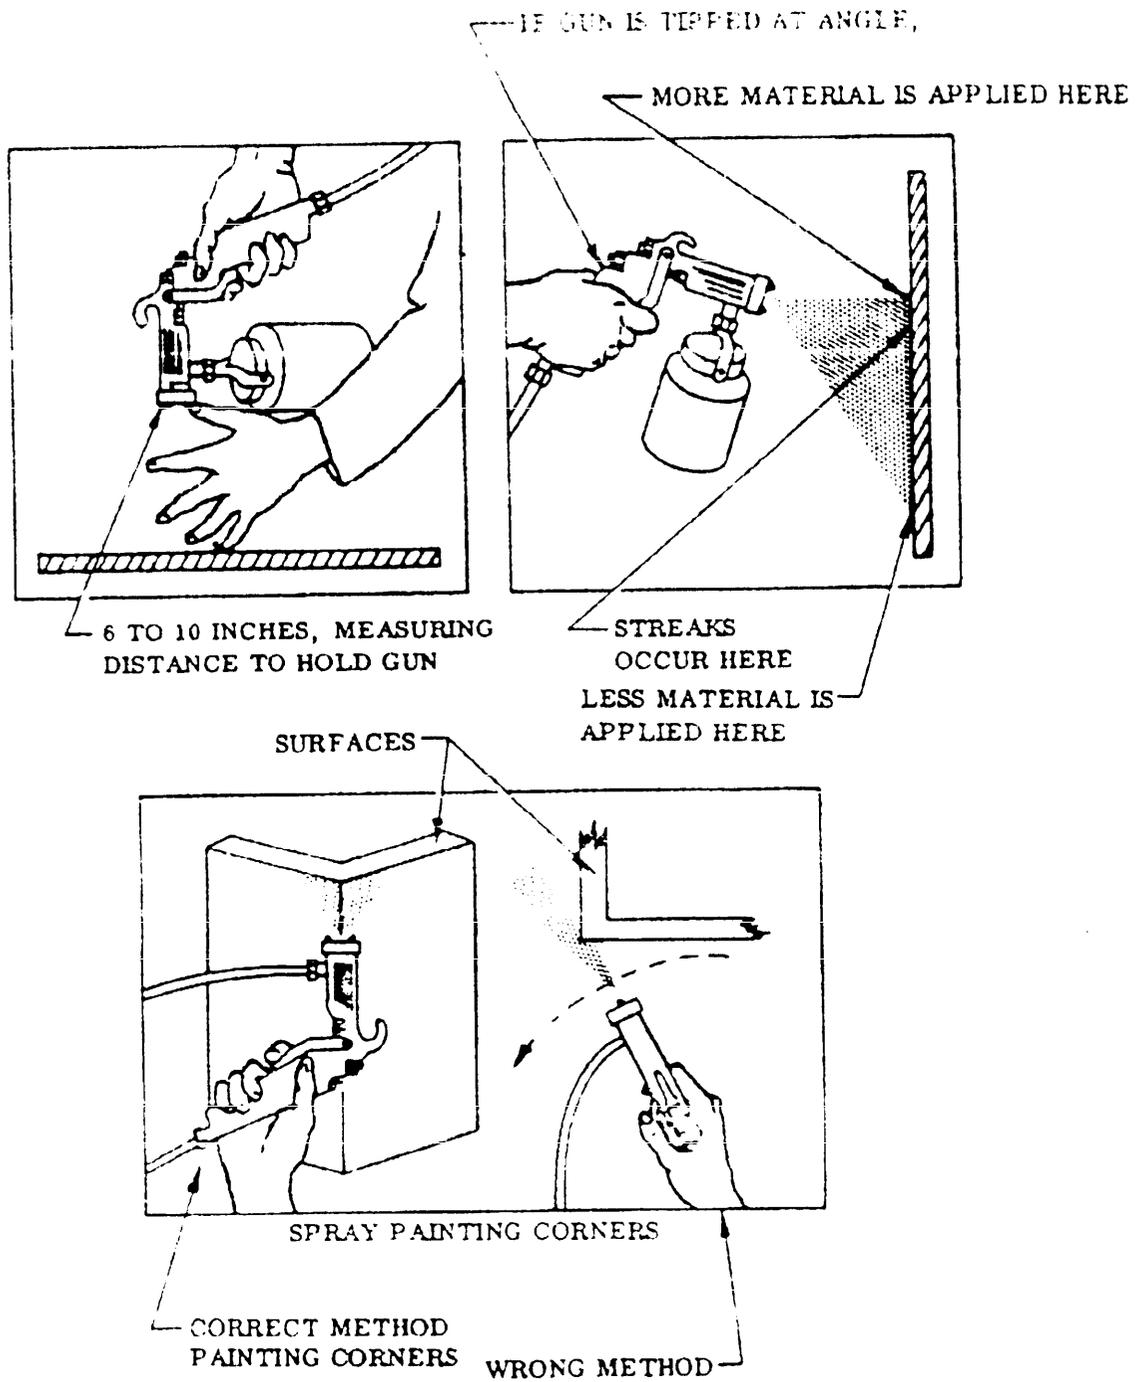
(Sheet 1 of 2). Spray painting technique
